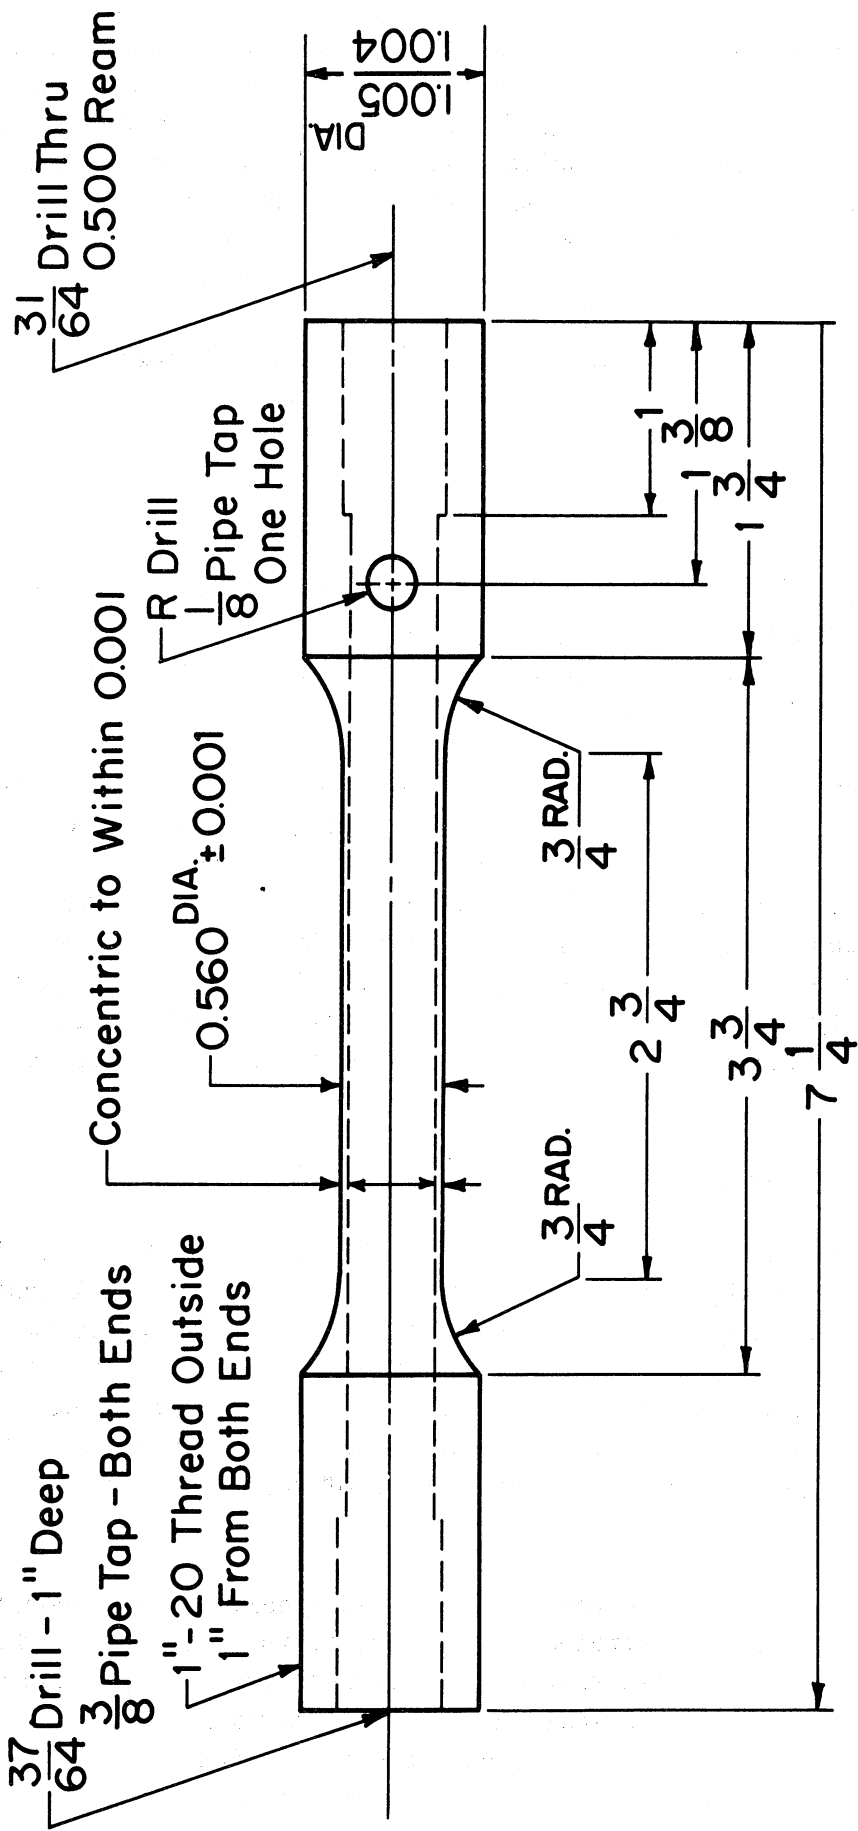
Dimensions of tubular specimens. The test length was made 1-3/8 in. (instead of the 2-3/4 in. shown) when the excess axial load was to be compressive.
